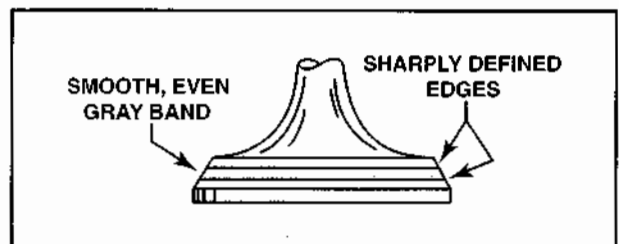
Proper valve lapping produces an extremely smooth surface and a well-defined contact area.
